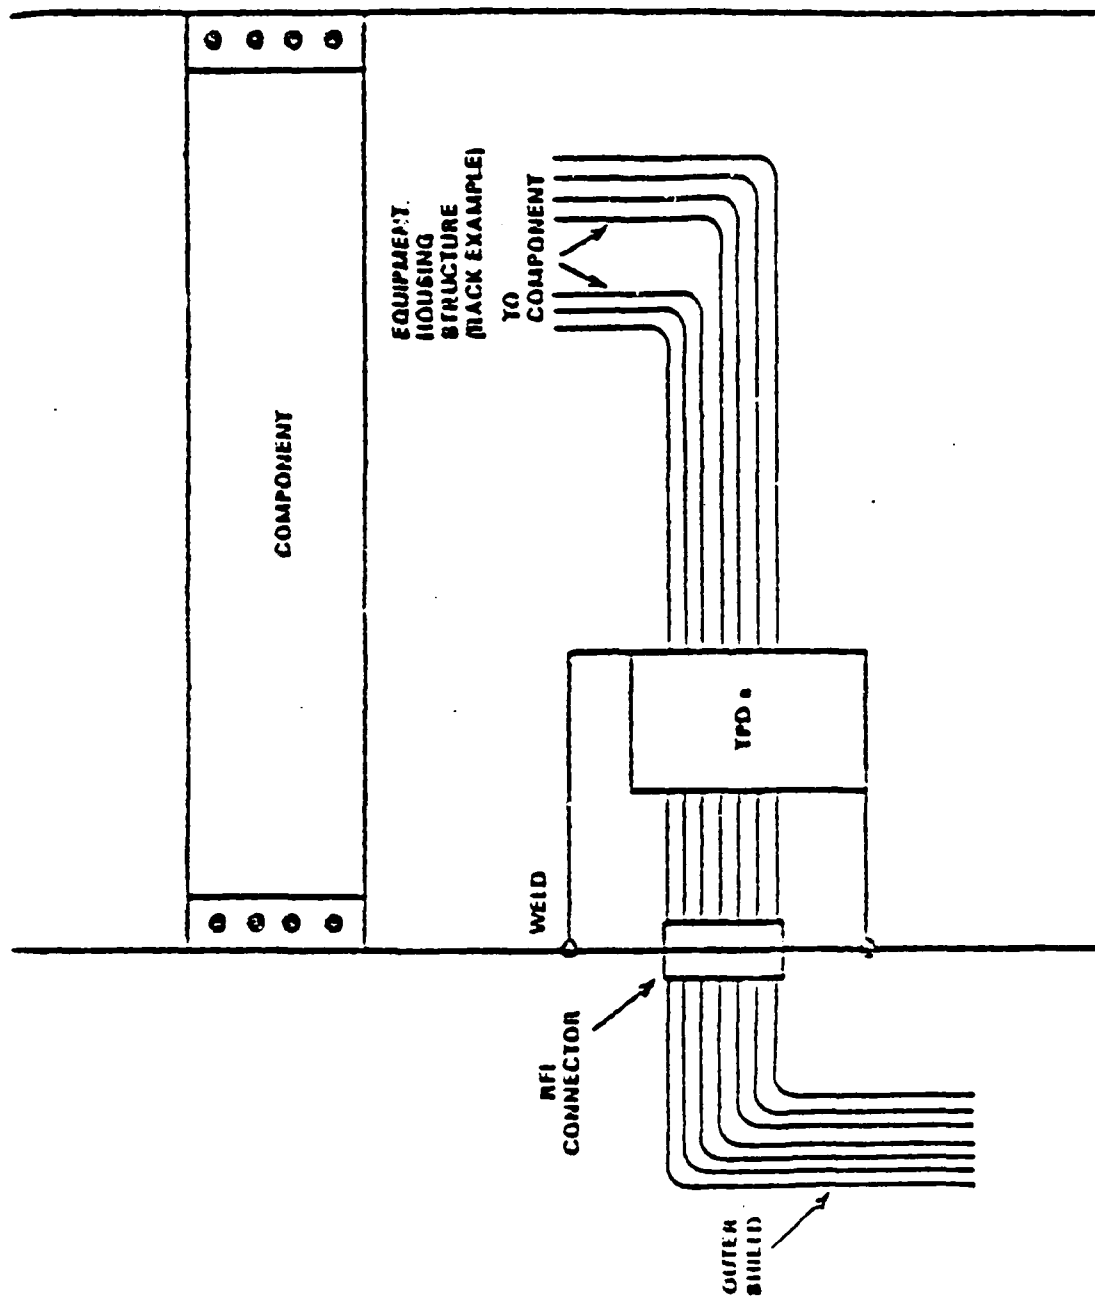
Example of signal and control entry to an equipment housing (rack example). Terminal protection treatment of the individual wires and shielded pairs are discussed in Section 6.3.8 [9.3]
